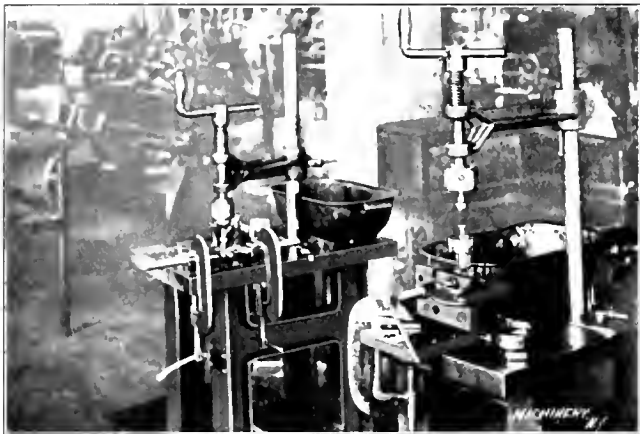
Small Hand-operated Machines for Re-cutting Cap-screws or Re-tapping Nuts
